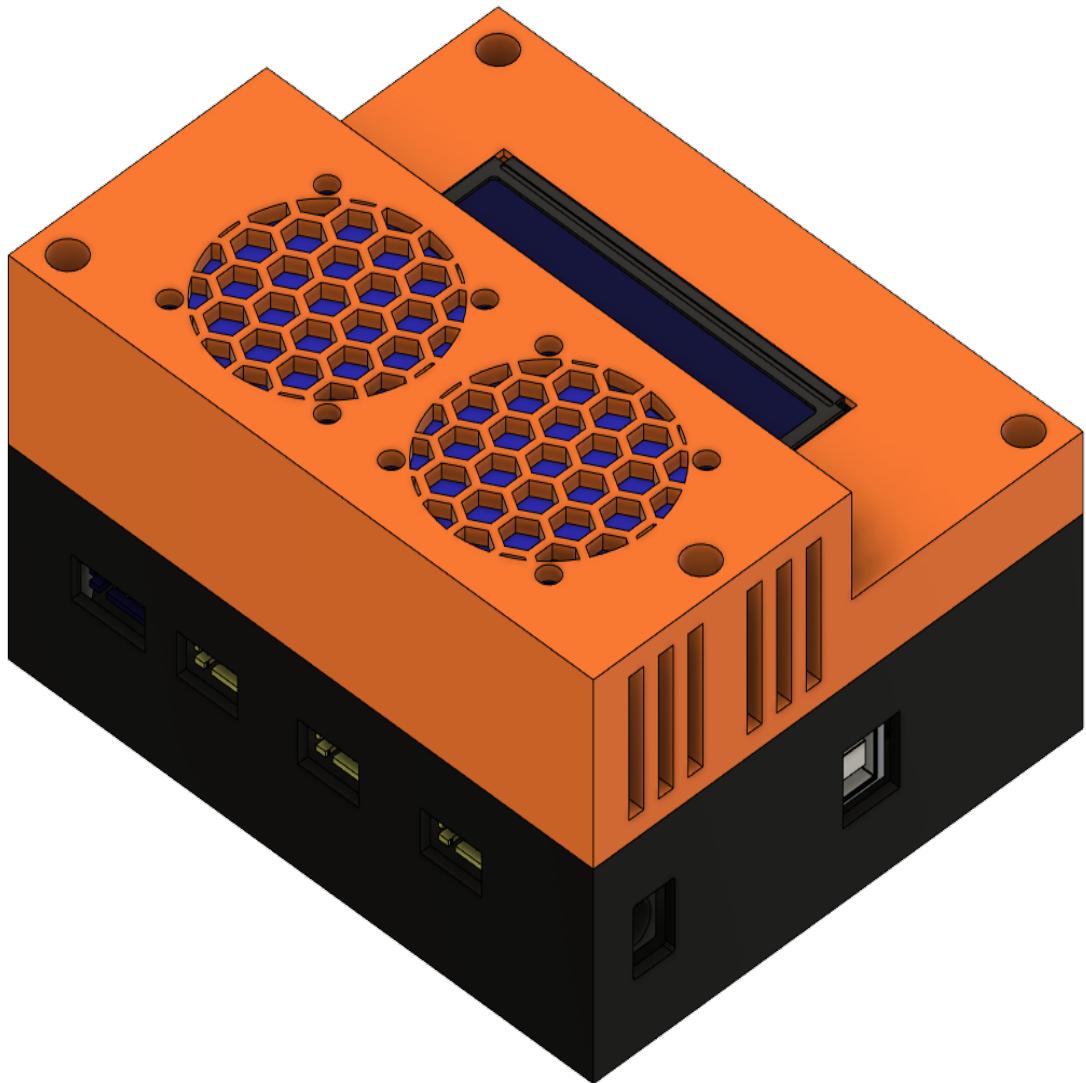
This is a rendering of the 3D model of what both pieces would look like together. This model has the model for the PCB inside, and has blue boxes for fans.
